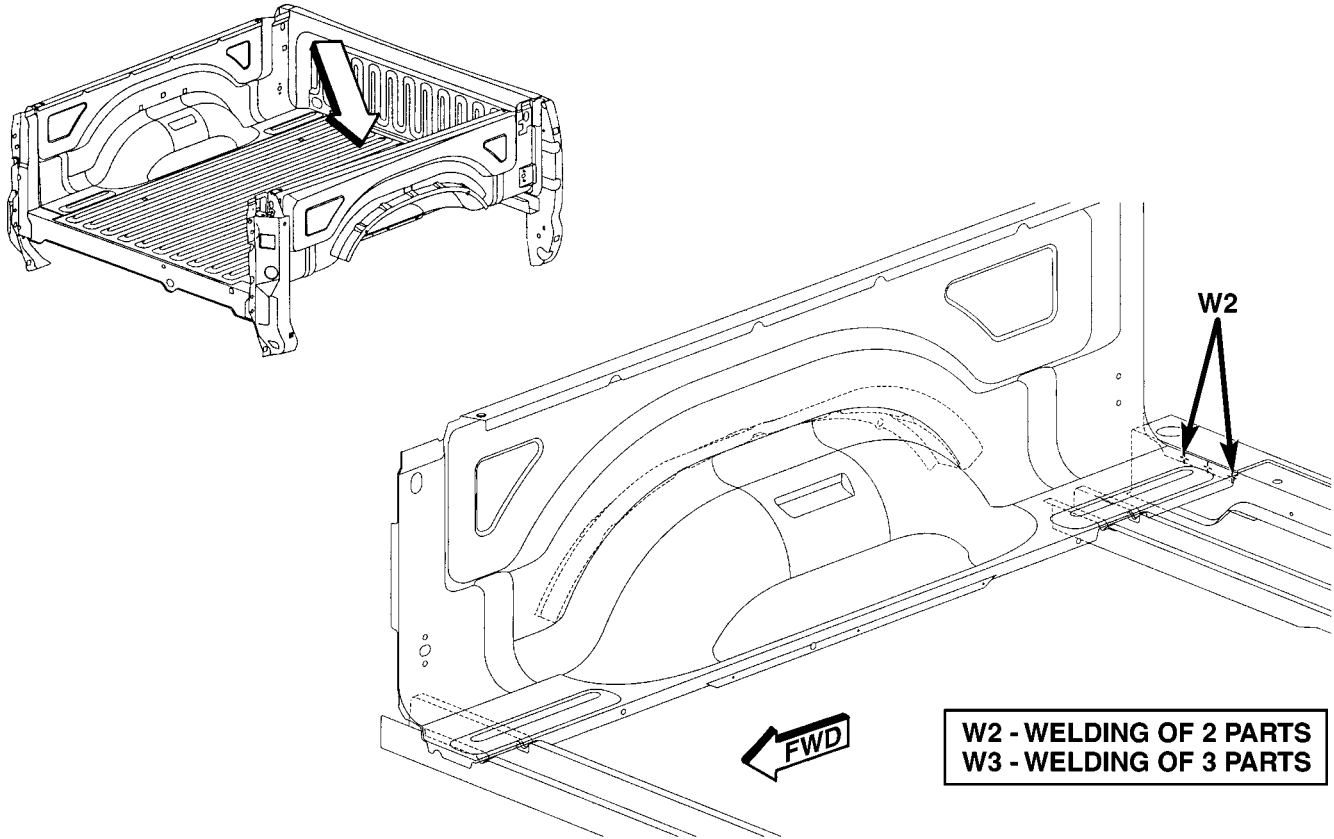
BOX FLOOR SILL CROSSMEMBER - SHORT CARGO BOX ONLY
